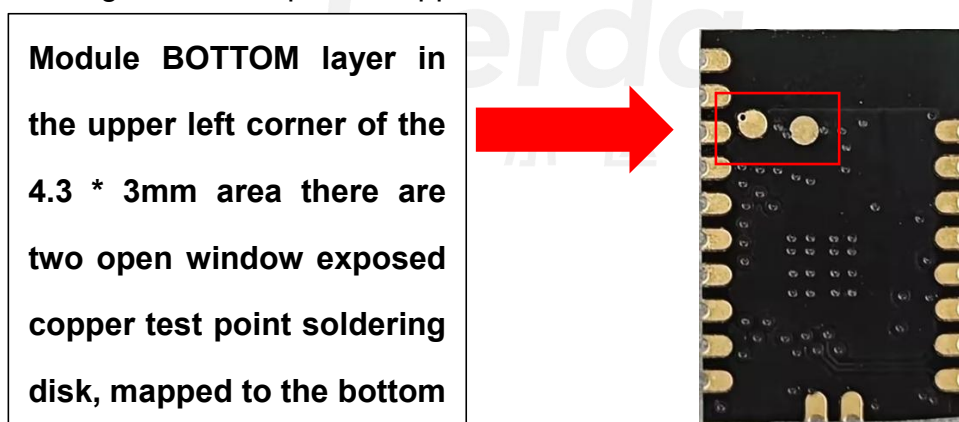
Test Spot Solder Pad Locations on the Bottom of the Module
